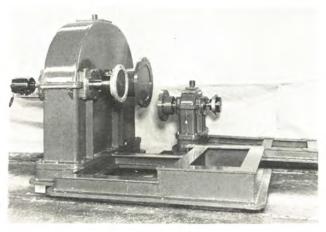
Herringbone Gear Speed Reducers for paper mill
